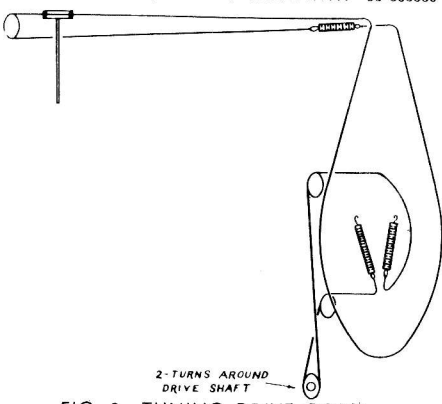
TUNING DRIVE CORD ARRANGEMENT
